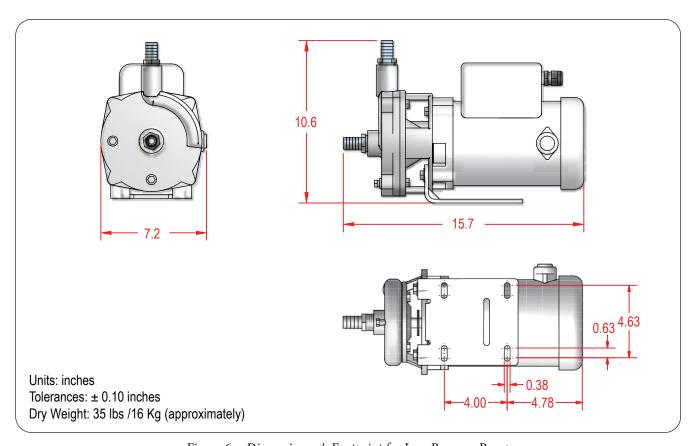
Dimensions, & Footprint for Low Pressure Pump
